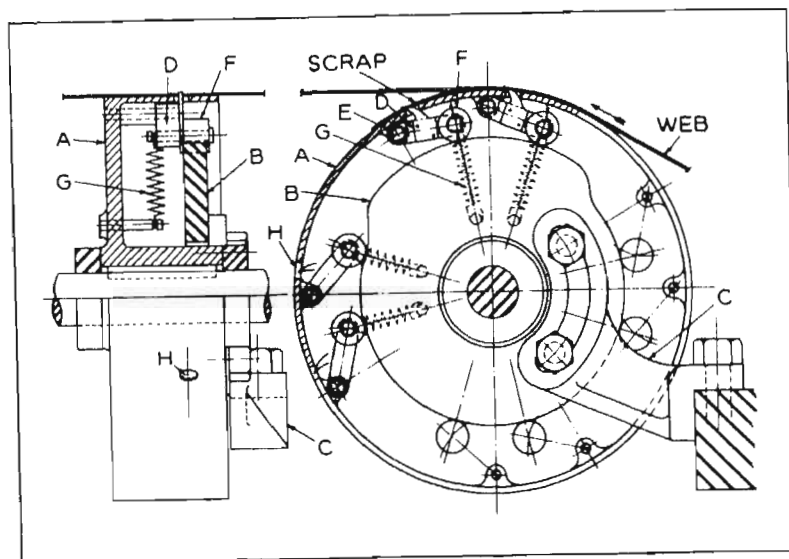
A rotating unit strips scrap material from a die-cut web on a production line handling cardboard cartons.
